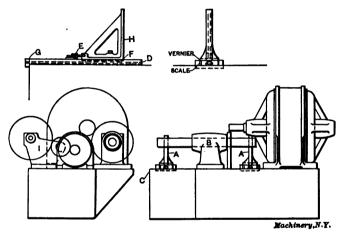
Arch with Bracket Members and Motor in Position for Laying Out
